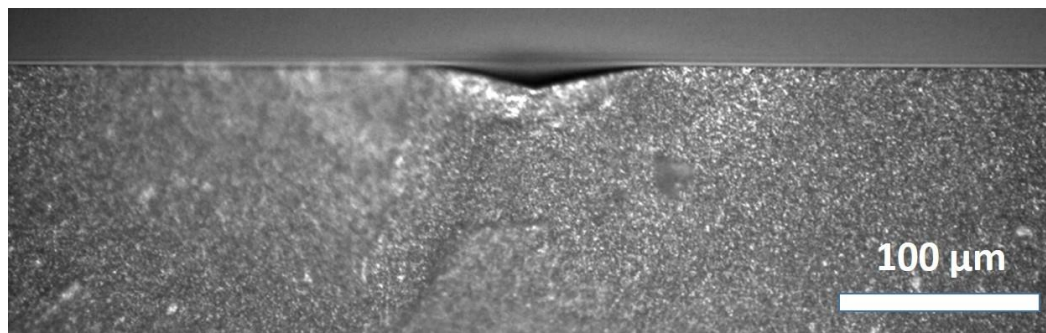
Fracture surface of test bar sintered at 1350 °C, fractured in ISB-test.
